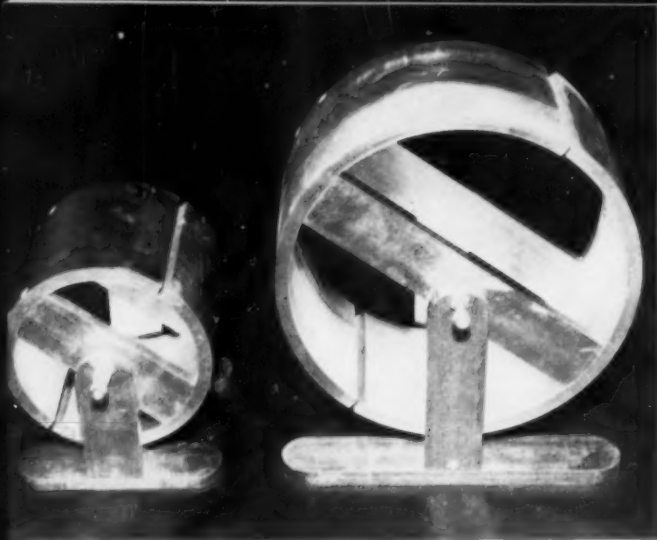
Shear Wave Reference Gages, Supplied in Various Diameters, May Be Used in Place of Drilling Test Holes in a Sample Forging
